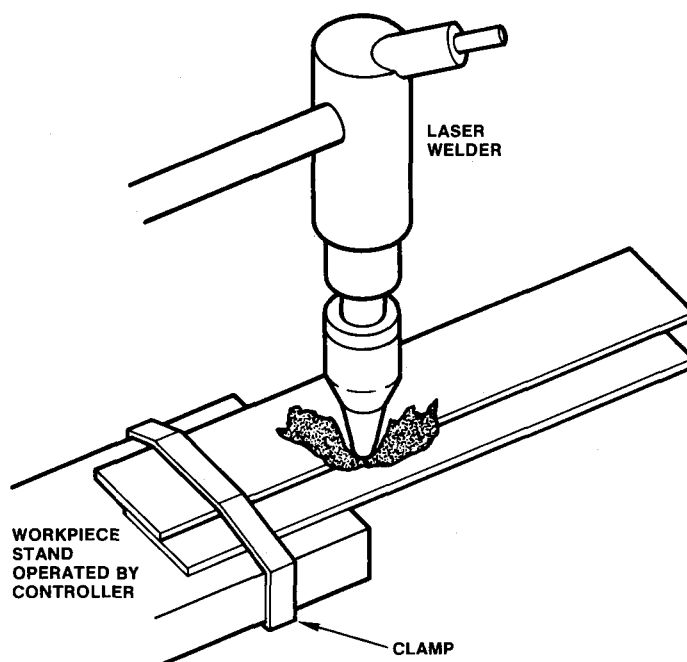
Conceptual arrangement of laser beam striking workpiece.
